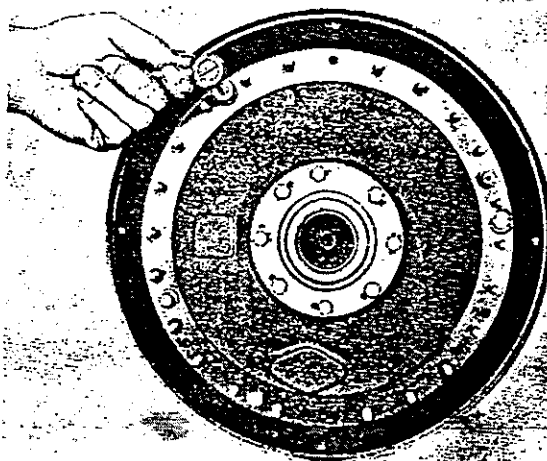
Removing Power Output Drive Gear Assembly Bolts
